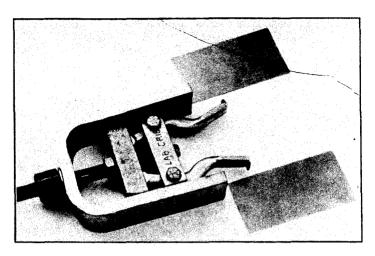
Valve Block Bearing Race Removal Tool and Shim Stock.
